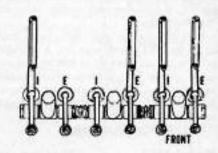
With No. 1 piston on "TDC" compression stroke on three cylinder engines, adjust intake and exhaust valve gap on No. 1 cylinder, exhaust valve gap on No. 2 cylinder and intake valve gap on No. 3 cylinder. Refer to Fig. 56.
